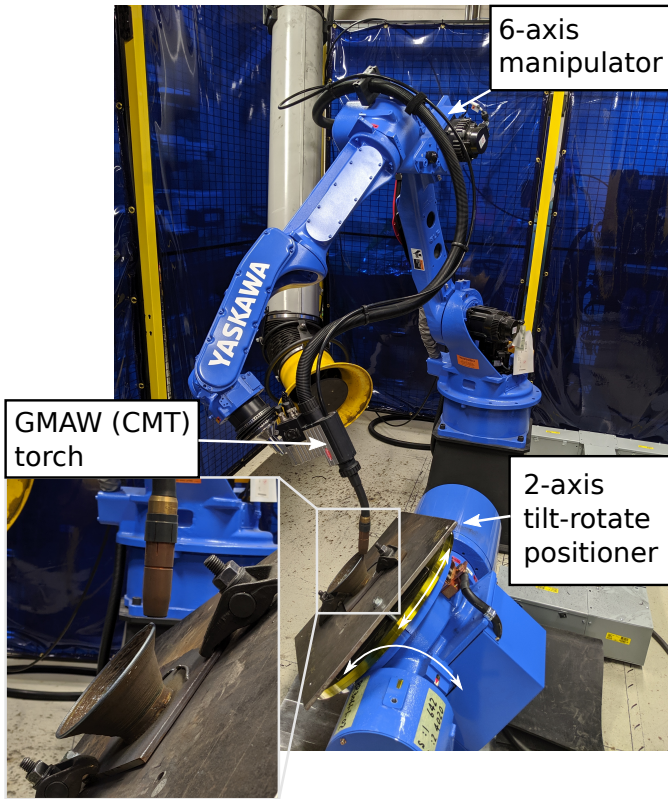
An example of a large-scale robotic AM fabrication platform using a wire and arc welding system for metal deposition.
